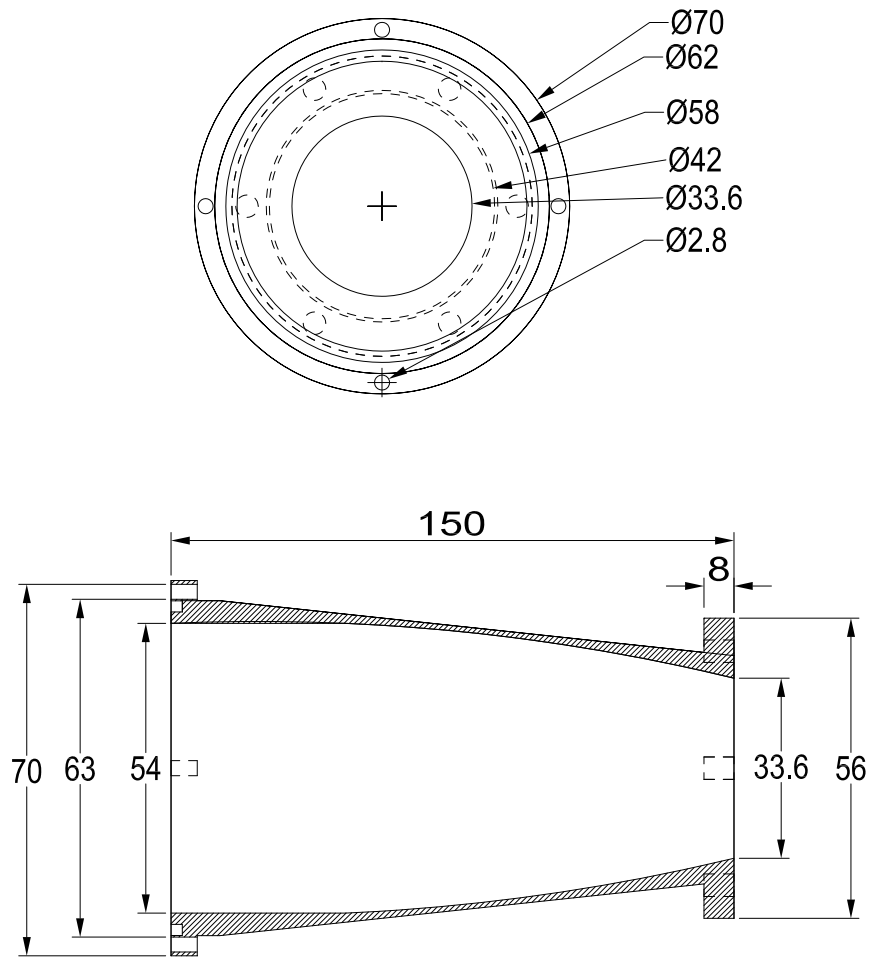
Profile of the connection section with main dimensions, all dimensions in mm.
